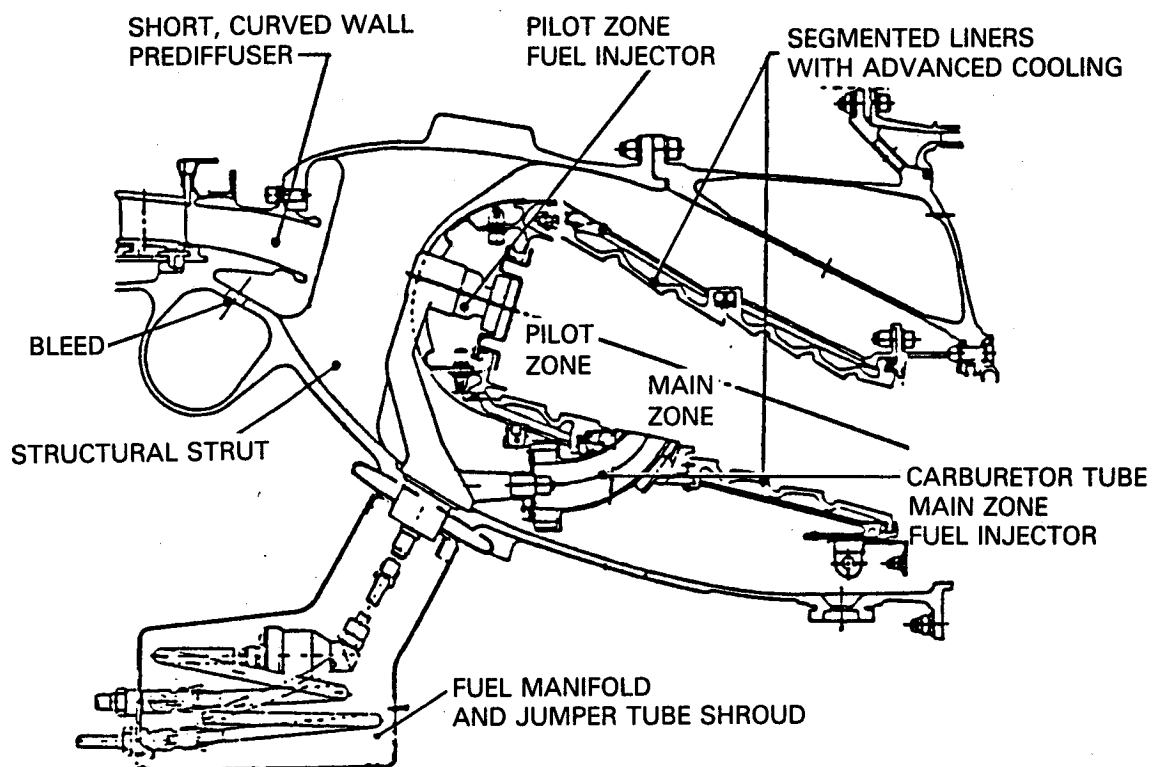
Cross Sectional View of Sector Combustor Test Rig
